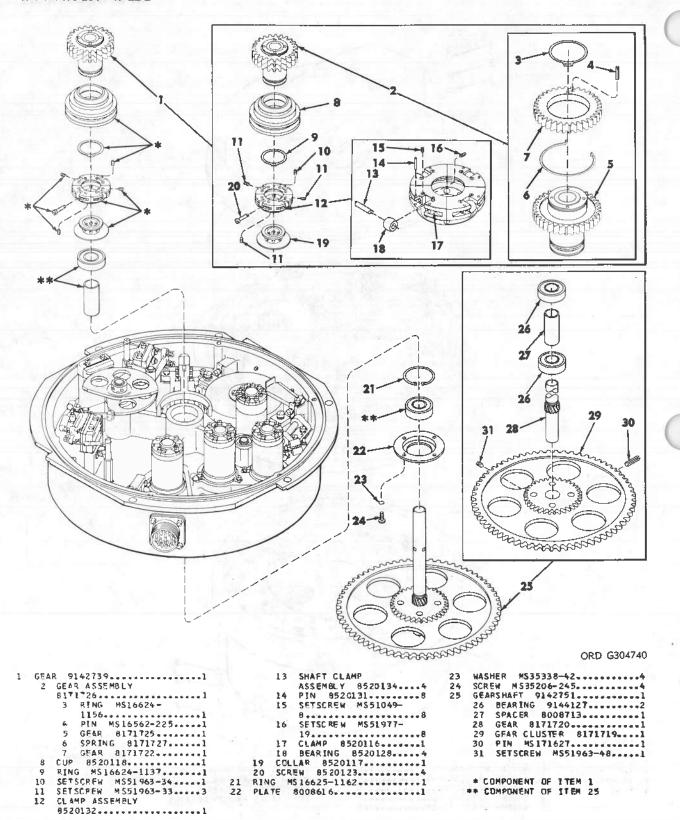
TRANSMITTER, POSITION, QUIDED MISSILE /9007946/-PARTIAL EXPLODED VIEW
